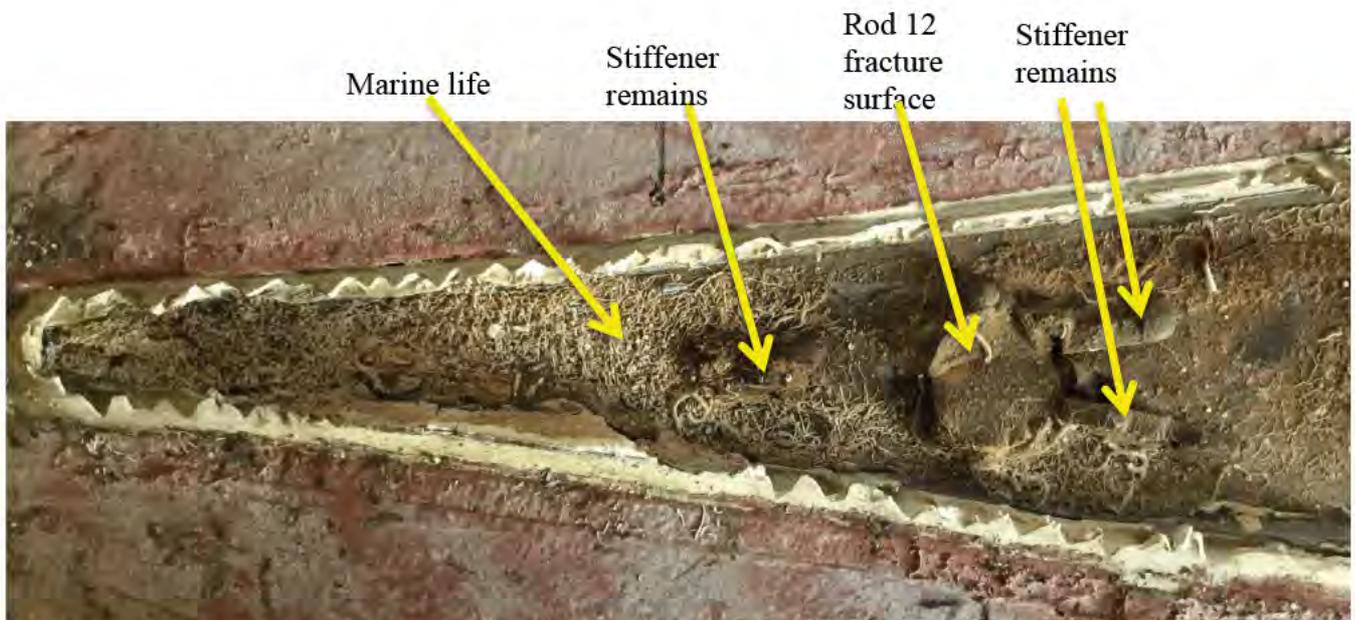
Showing fracture surfaces at position 12 of both Rod 12 and the surrounding three stiffeners.
